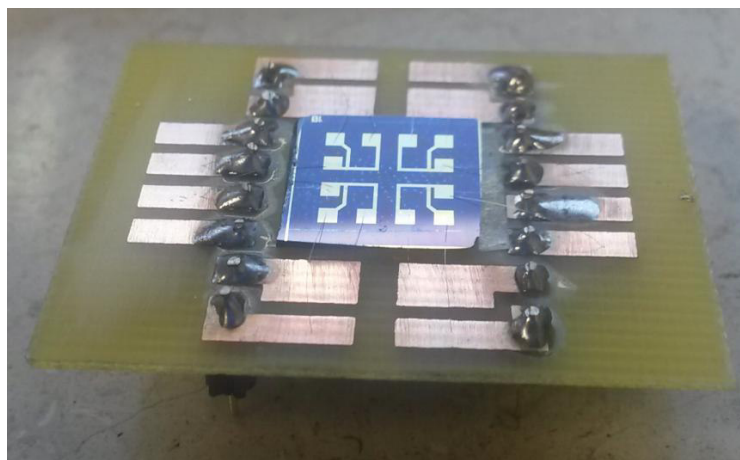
Wire bonded Si-chip (AlSi 1% wire used 25  $\mu\text{m}$  thick using ultrasound welding).
